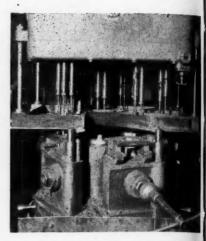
Twelve holes are drilled and six an apotfaced in the cylinder bearing plate is machine.
